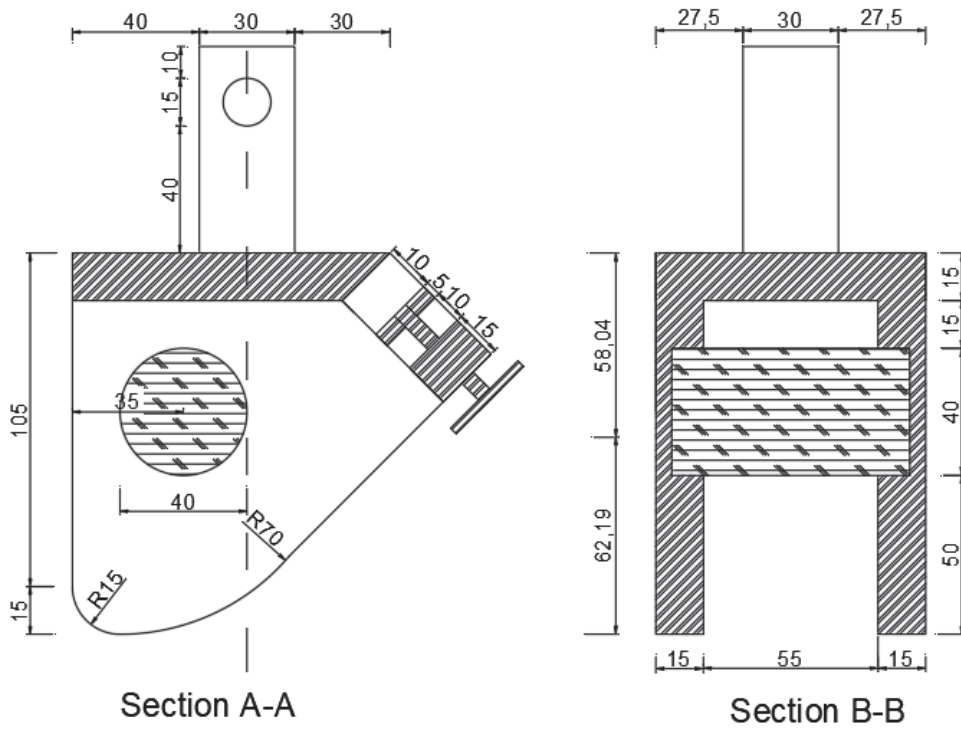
Sections A-A and B-B of the mechanical grip system (dimensions are in mm).
